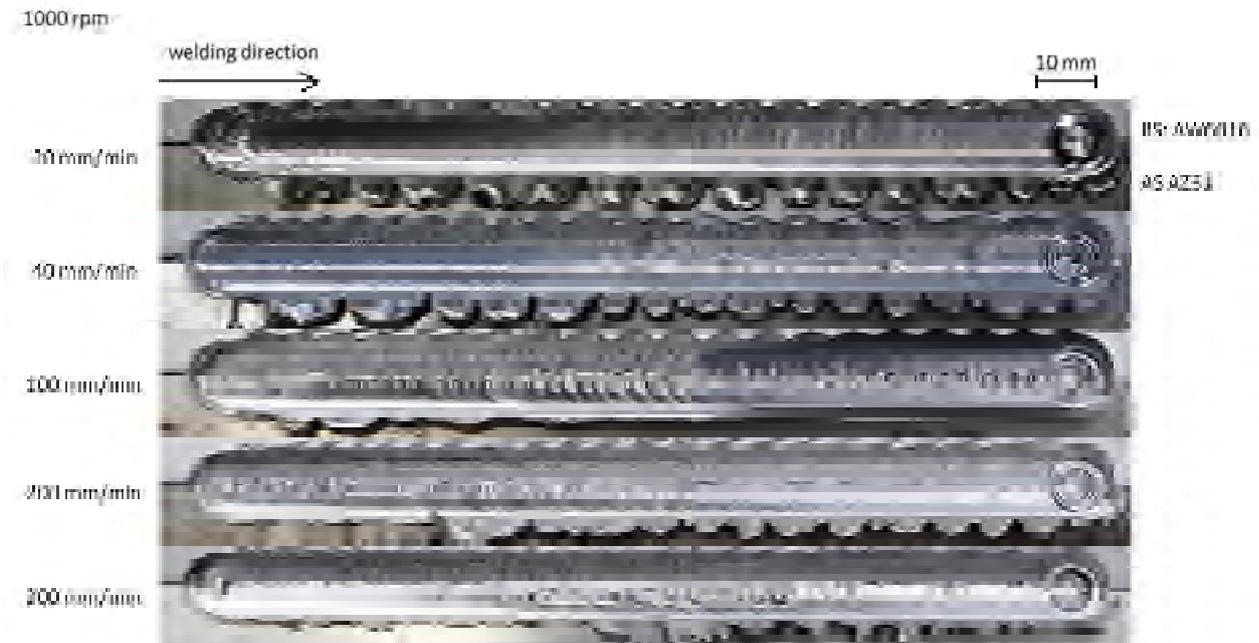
surface appearance for FSW of extruded AZ31/AW6016 for different welding speeds at a constant rotational speed of 1000 rpm.
